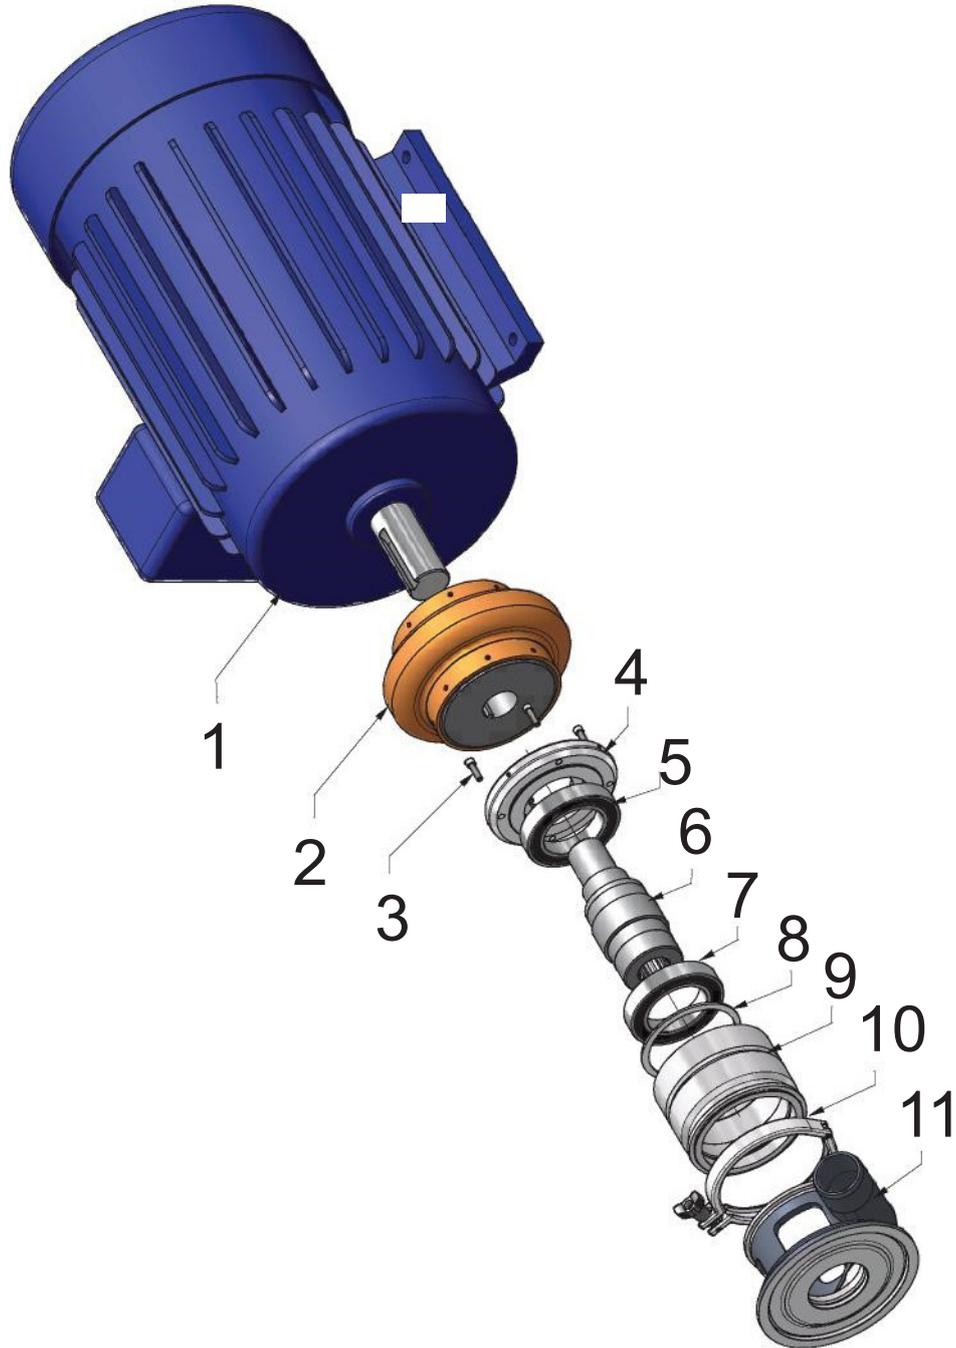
Upper Bearings, Direct Coupled, Electric Drive Motor
